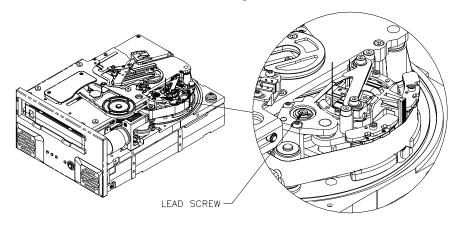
Diagram of Viper 200 showing lead screw (tape threaded on take-up reel)
